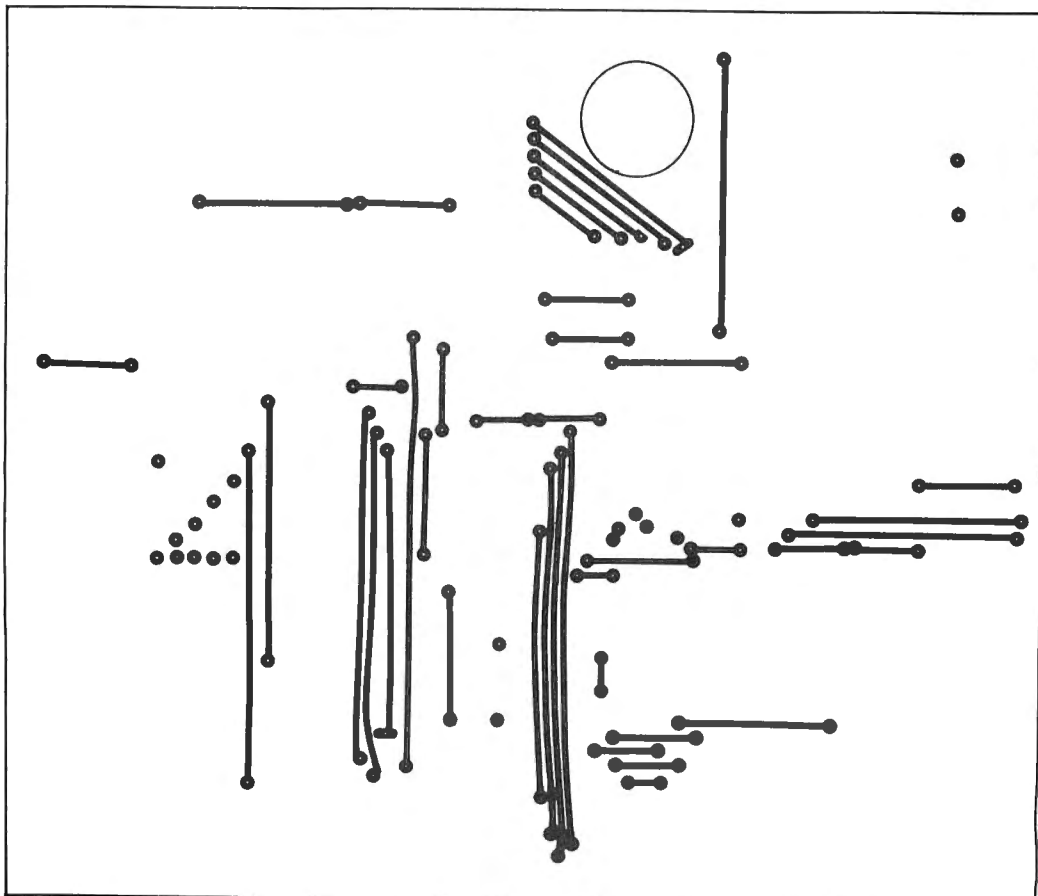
Jumper arrangement for lowercase board, viewed from above. Jumpers should be soldered in place before the integrated circuits are mounted. Note that this figure will produce a double-sided PC board.
